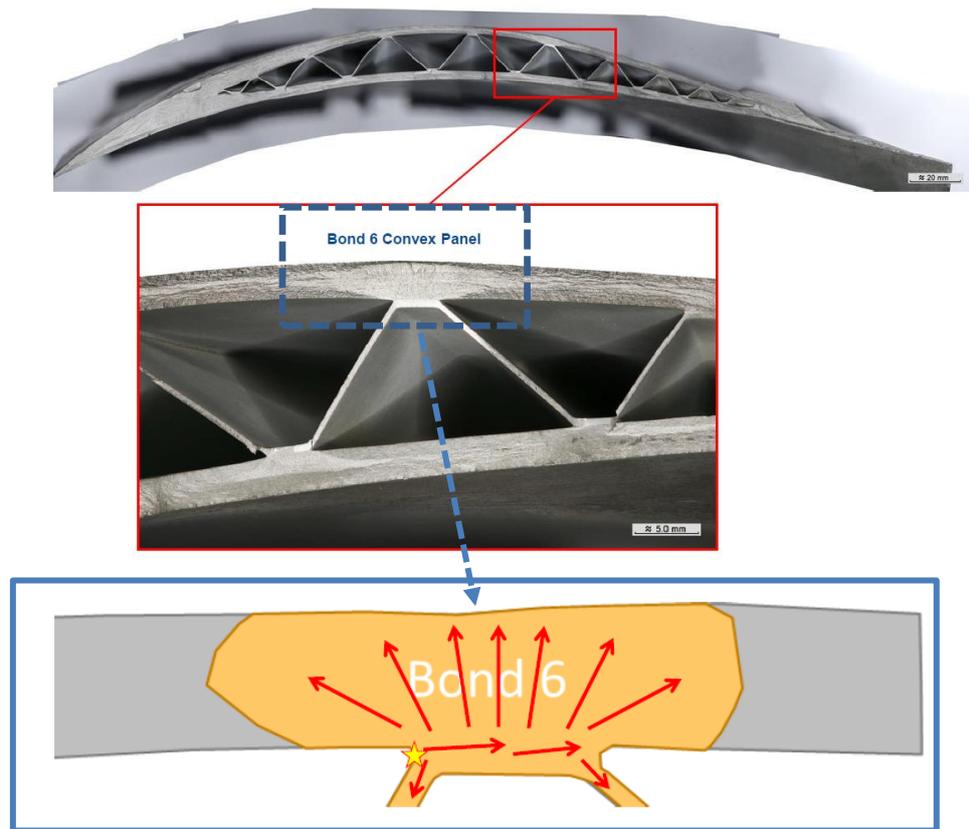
Fatigue failure location (Bond 6) and failure mechanism
